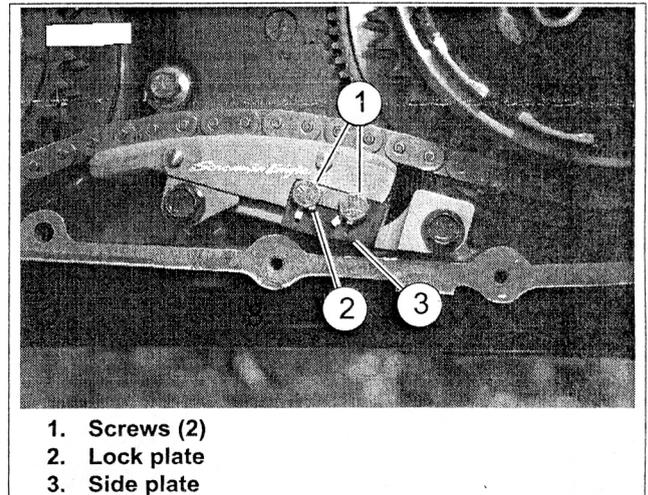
Install Cap Screws to Side Plate and Lock Plate
